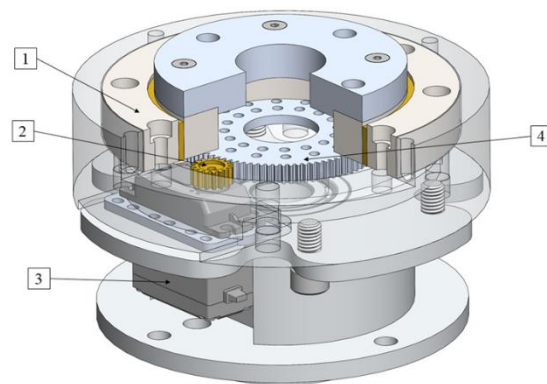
Yaw adjustment system. Parts include the roller ring bearing (1), a 16-tooth gear (2), a continuous rotation servo (3), and an 84-tooth gear (4).
